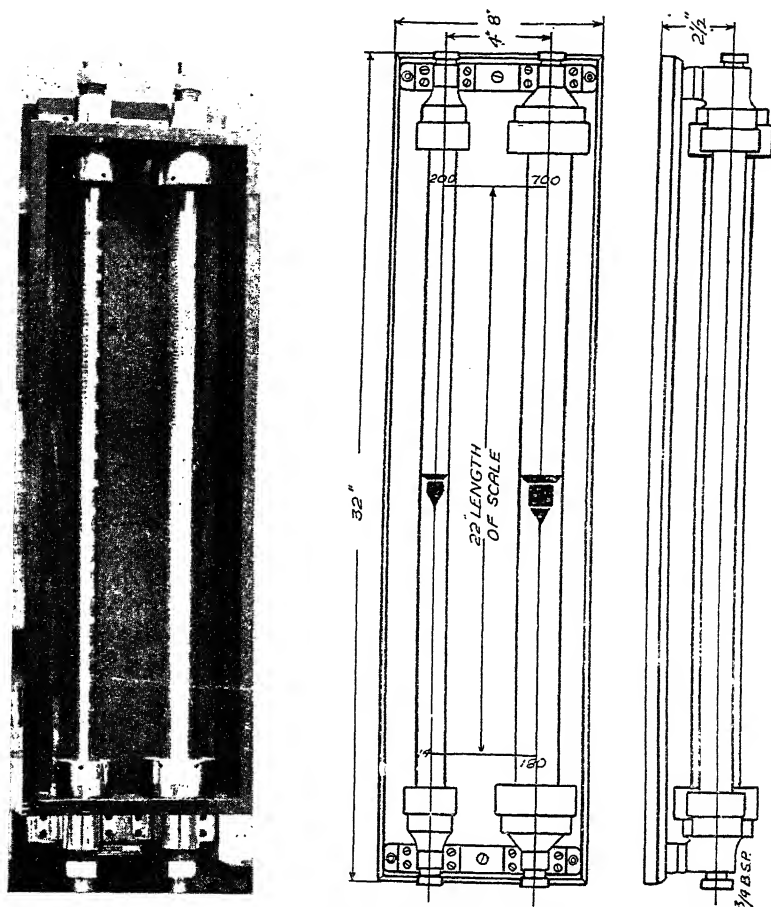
THE ROTAMETER, AN ACCURATE FORM OF FUEL MEASURING DEVICE.
